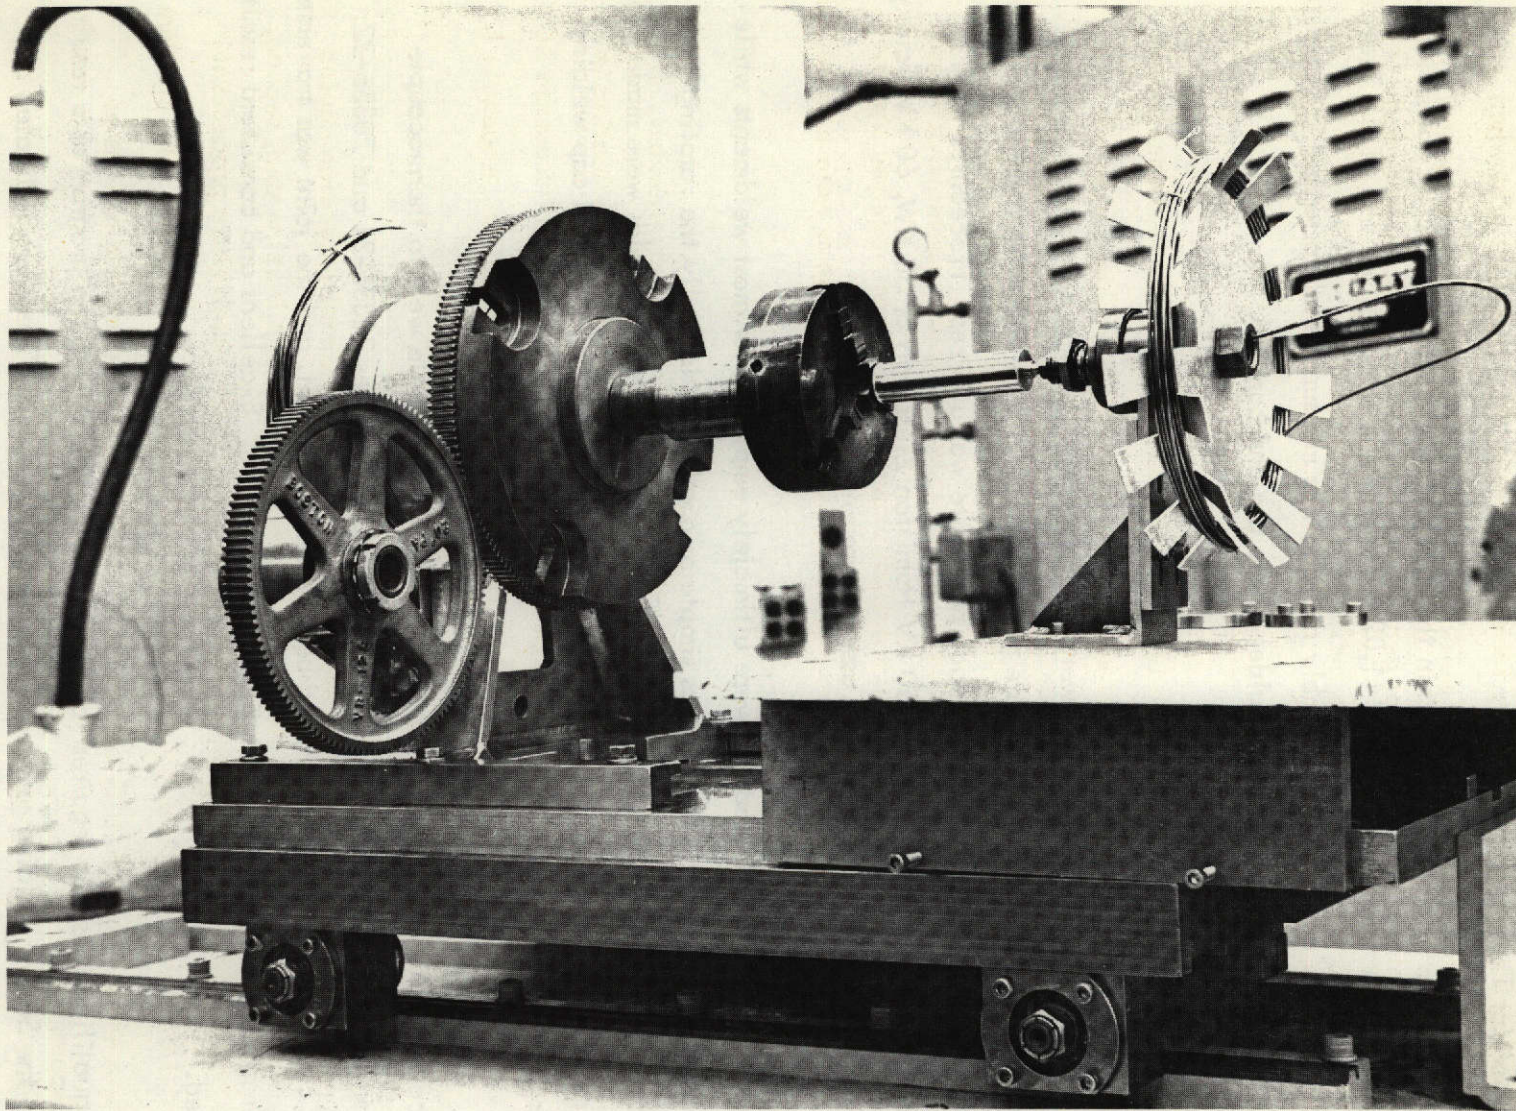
Fixture for Welding End Caps to Capsules With Thermocouples Attached
